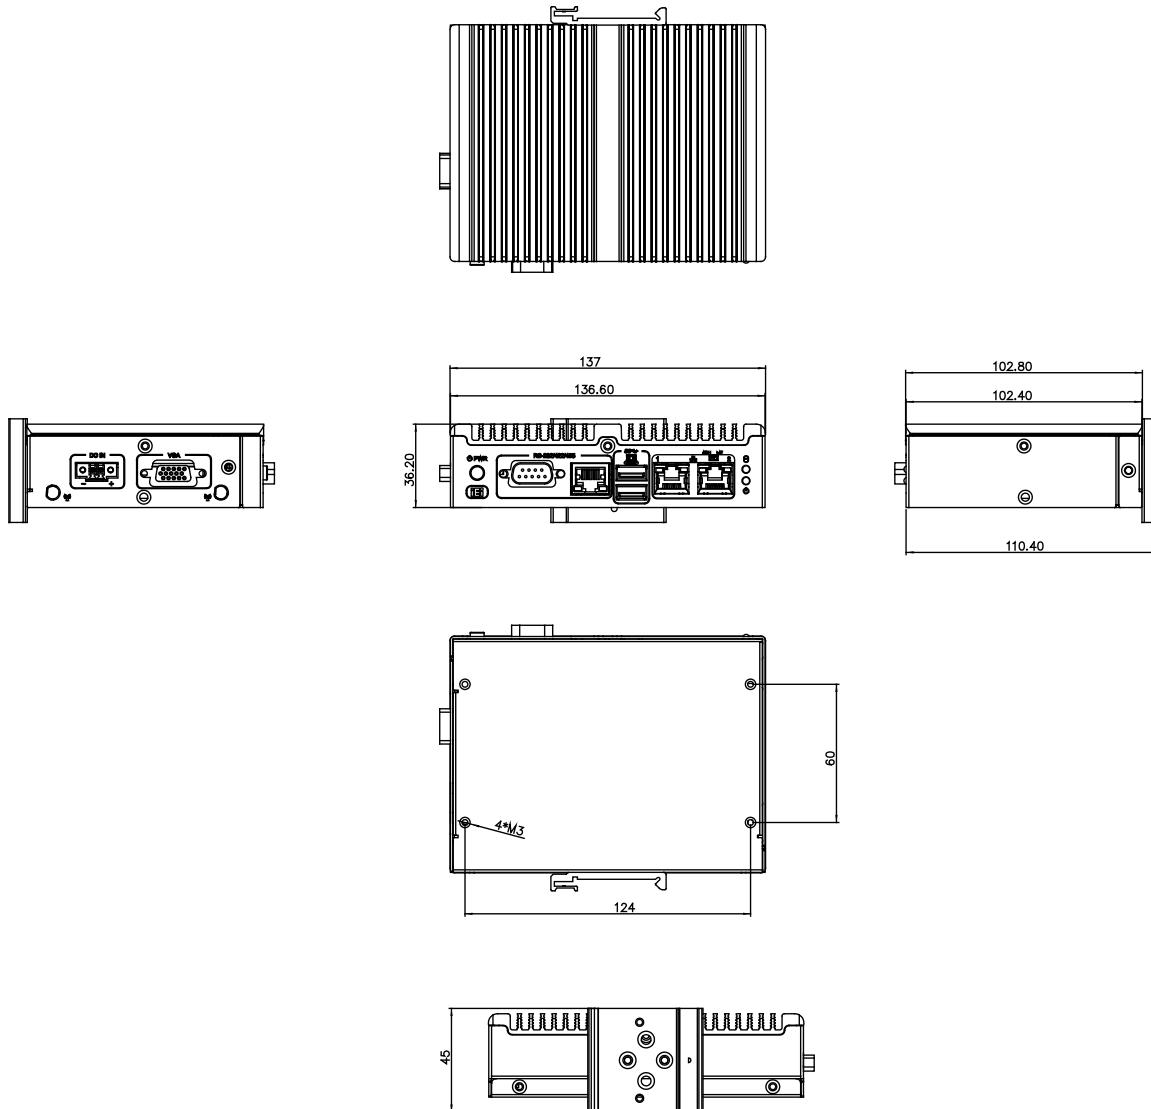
ITG-100-AL-E1/S Physical Dimensions (mm)
